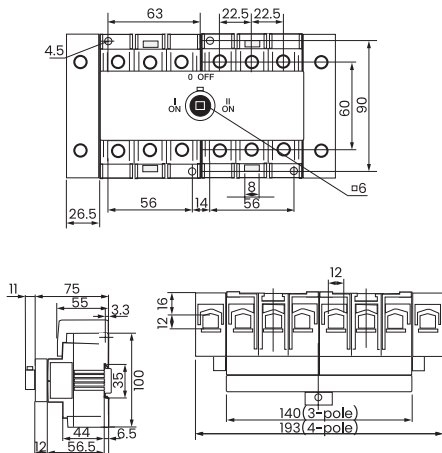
Overall and installation dimensions of 100-125 A 3P-4P changeover switches
